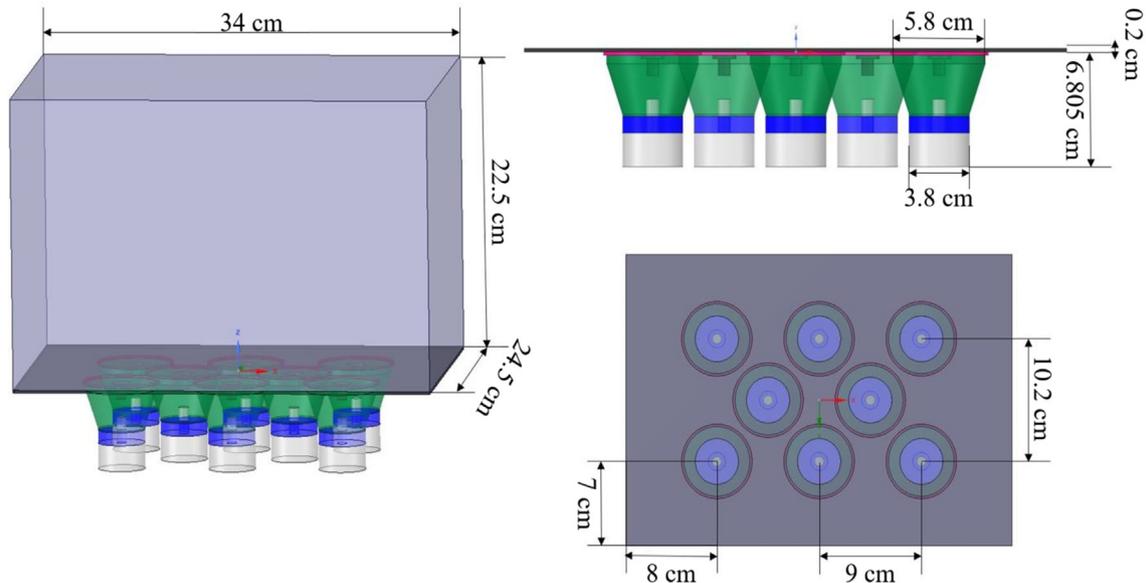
A diagram and dimension of industrial ultrasonic tank.
